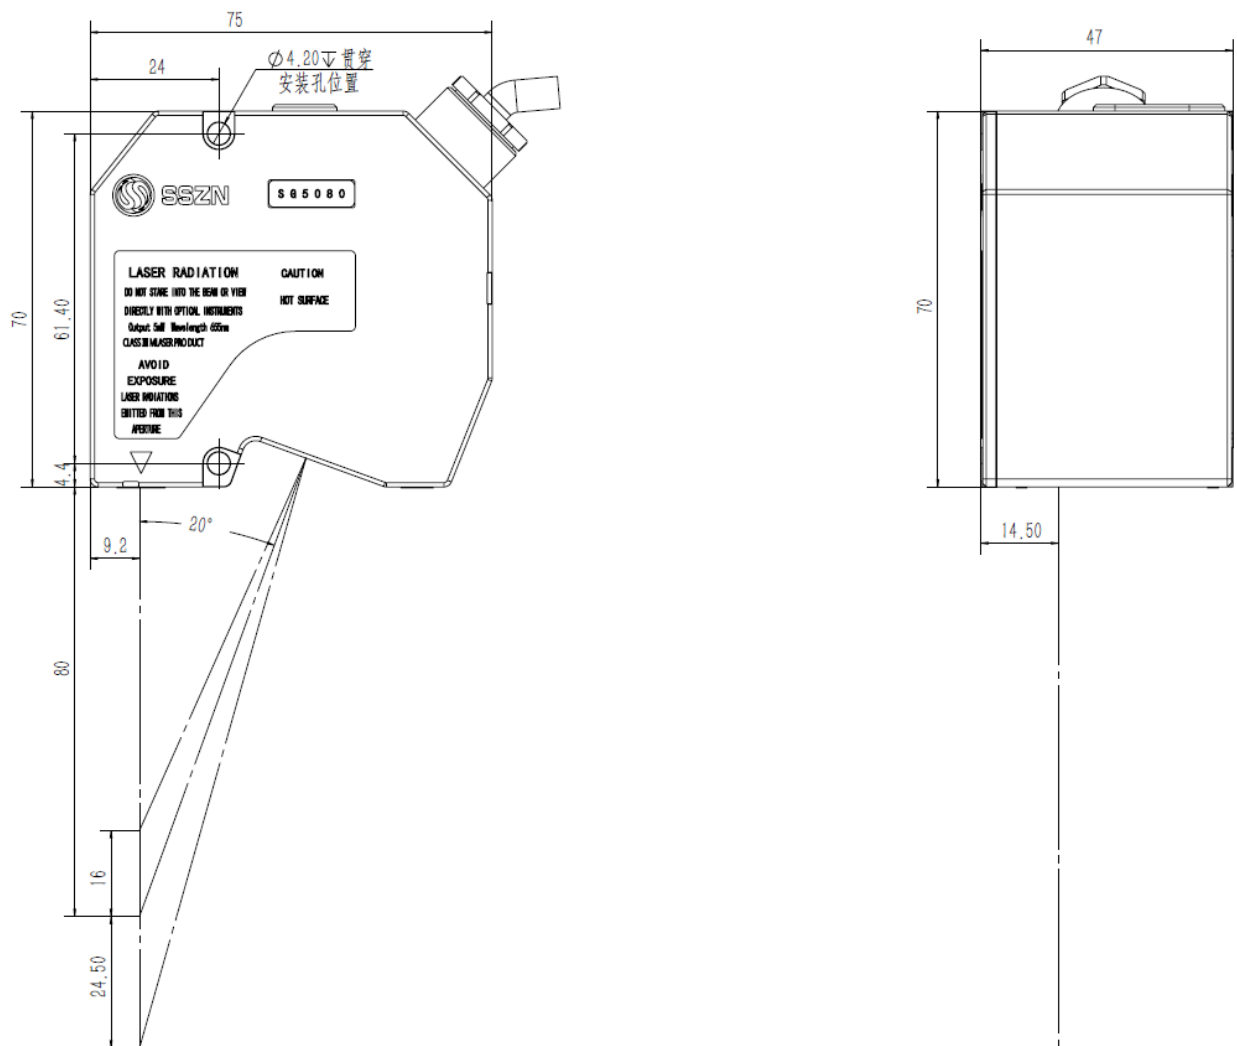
SG5080/5 Sensor Head dimensional diagram Unit (mm)
